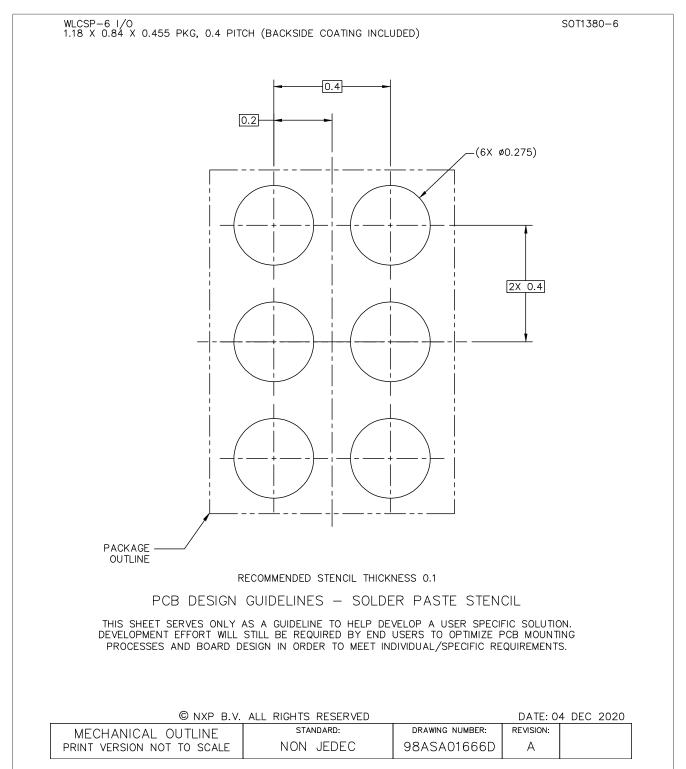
SOT1380-6 (WLCSP6) solder paste stencil
